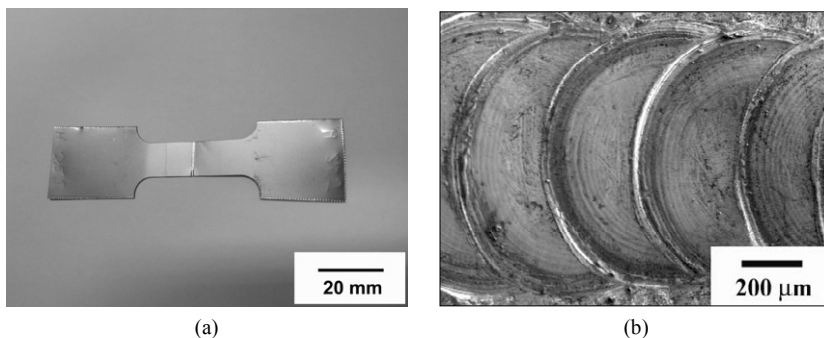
(a) Welded specimen for the tensile shear test; (b) and a pulsed weld bead
